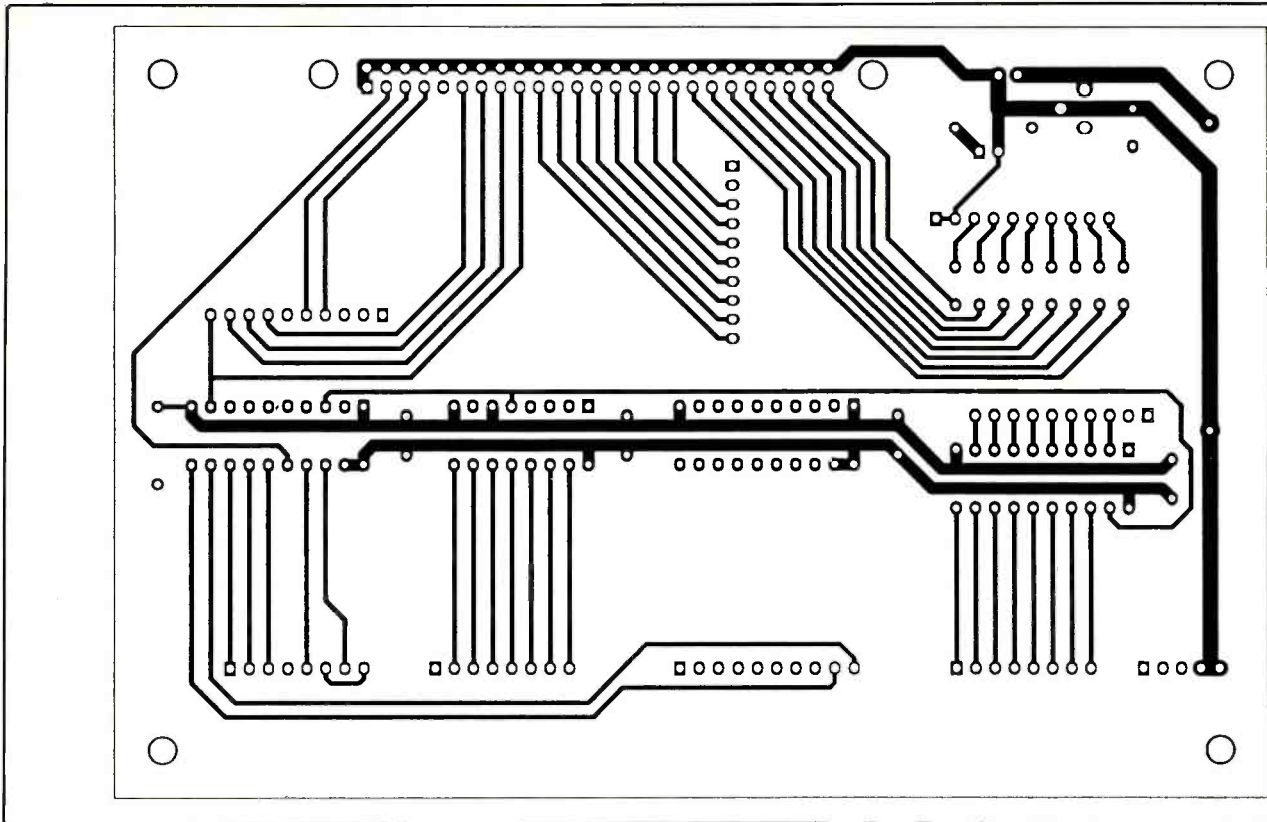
Actual-size fabrication guides for double-sided Remote Breakout pc board.
